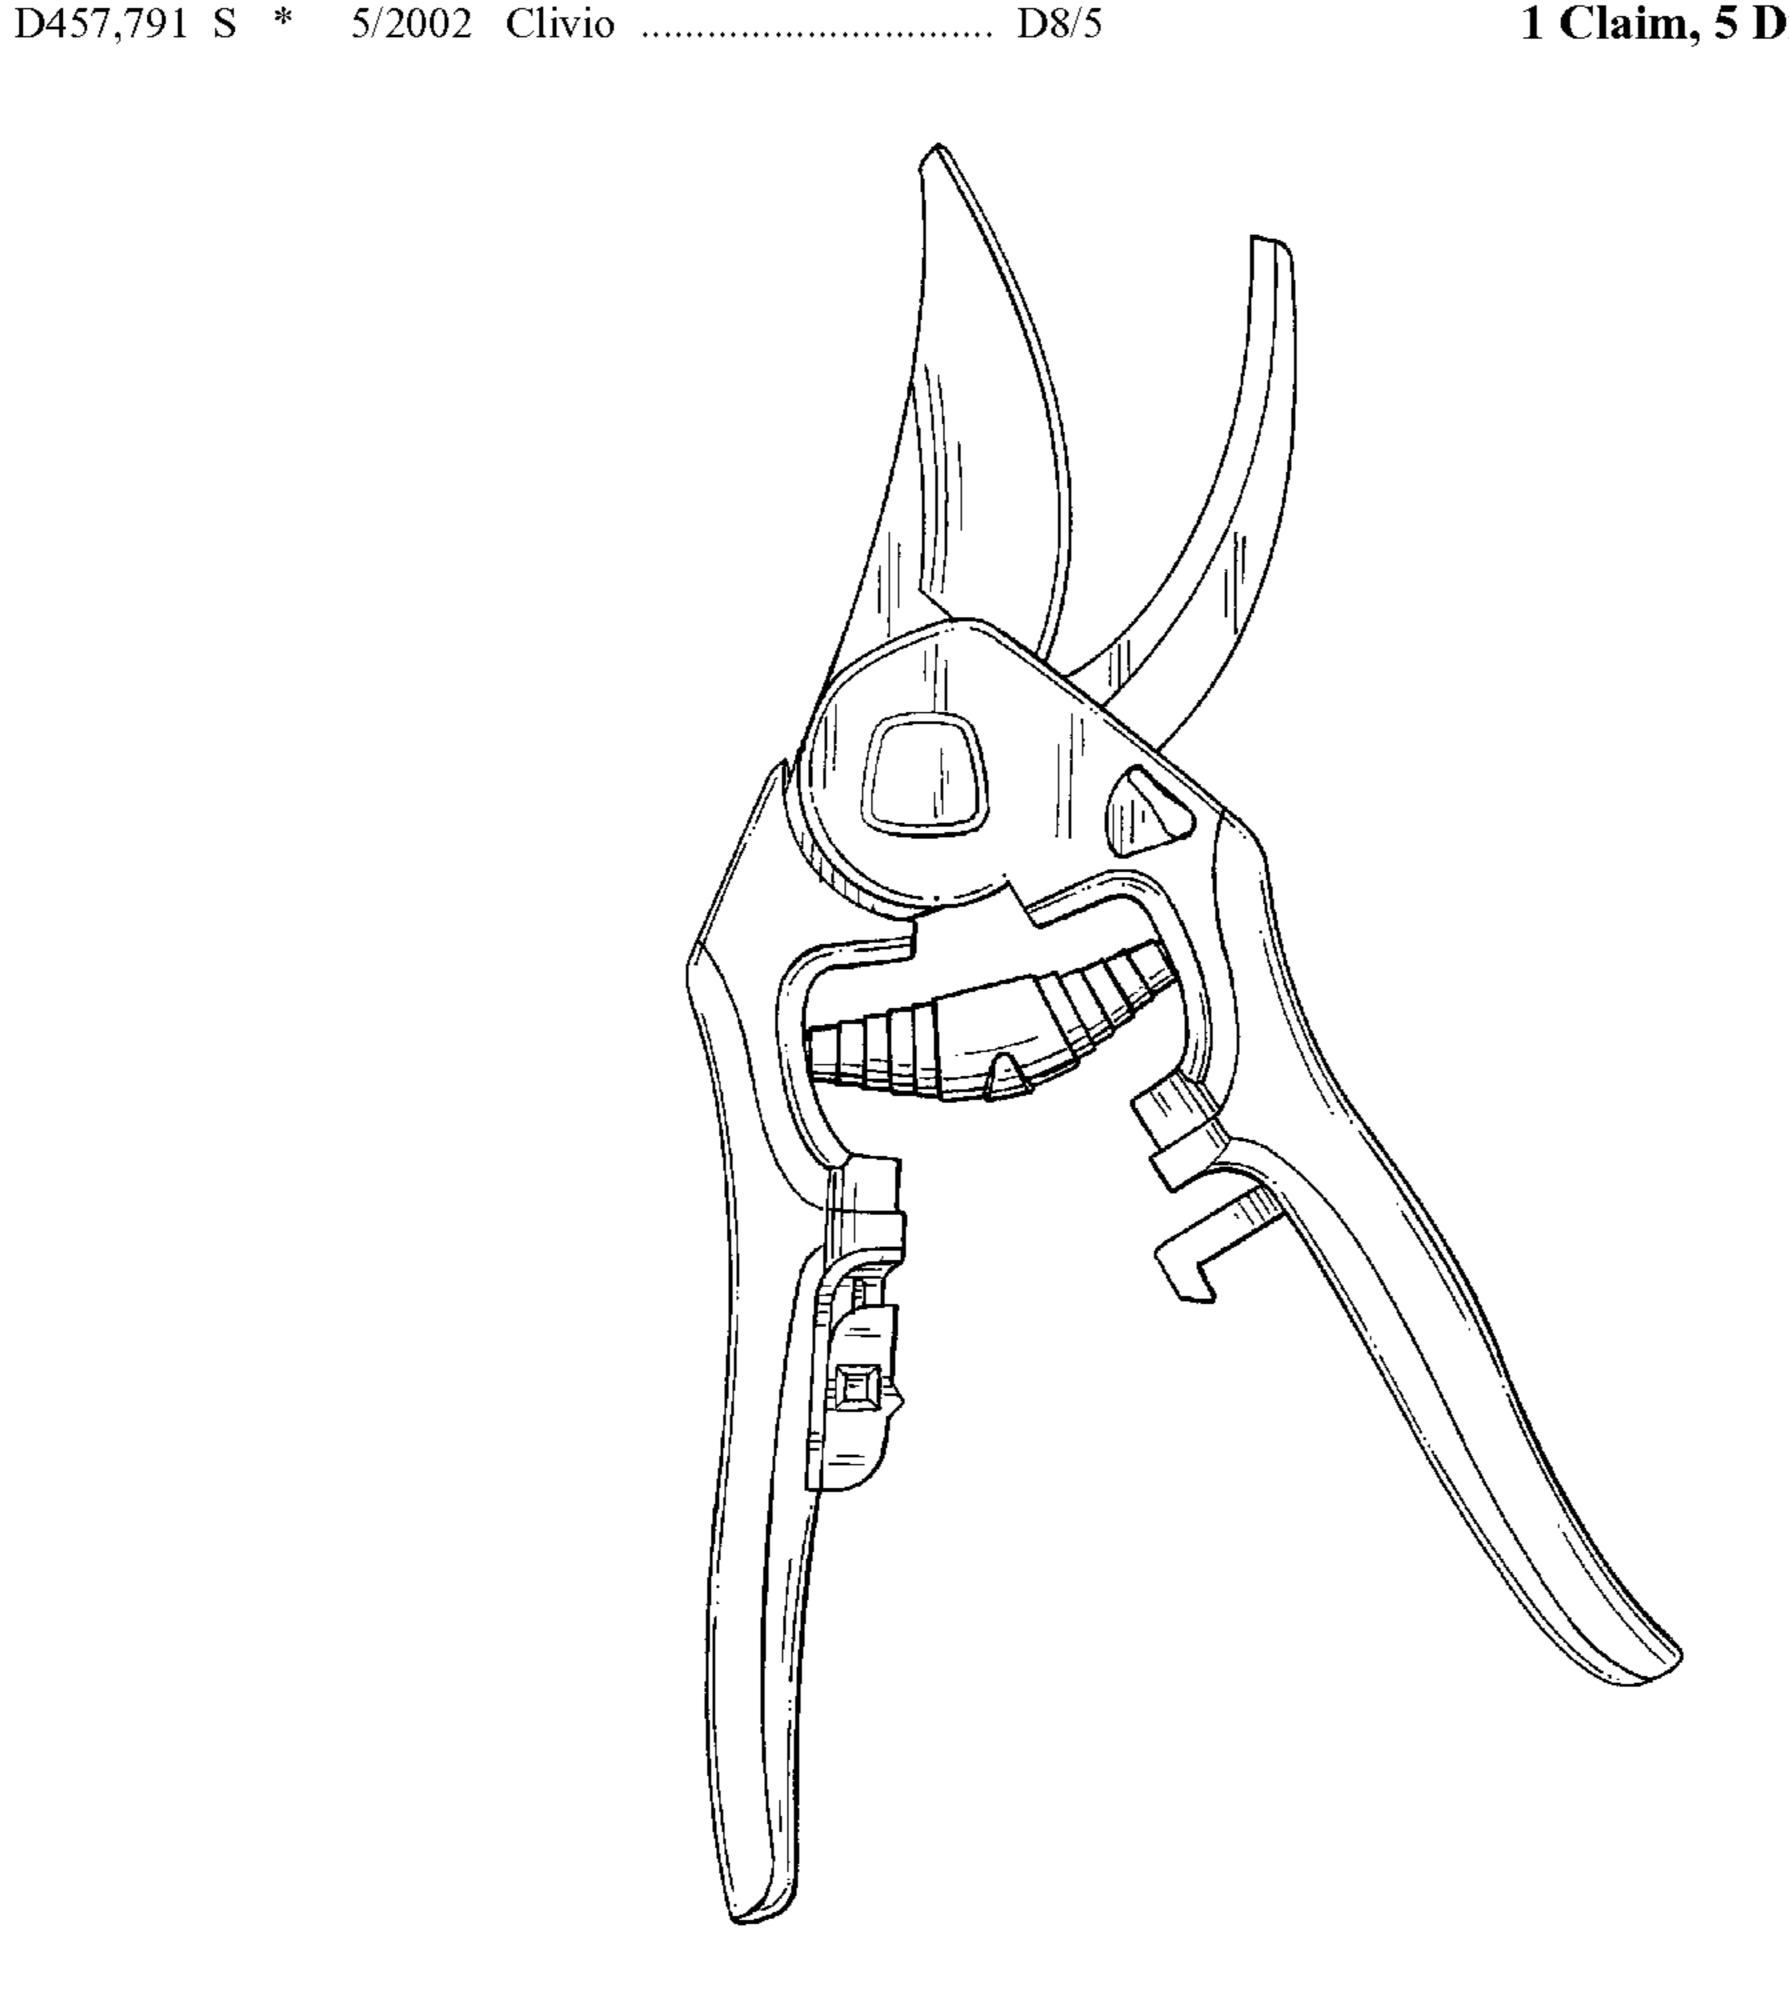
is a left side view of the hand cutting tool of the claimed design.
